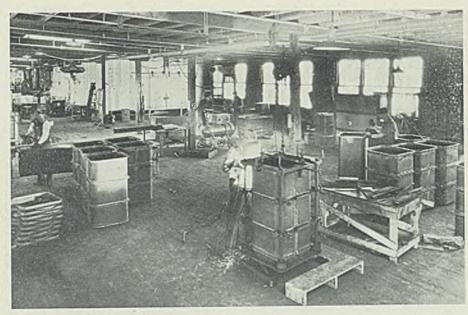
Tanks are welded electrically in two jigs, one for one joint and one for the other. A helper loads and unloads the jigs, making the welding operation practically continuous
